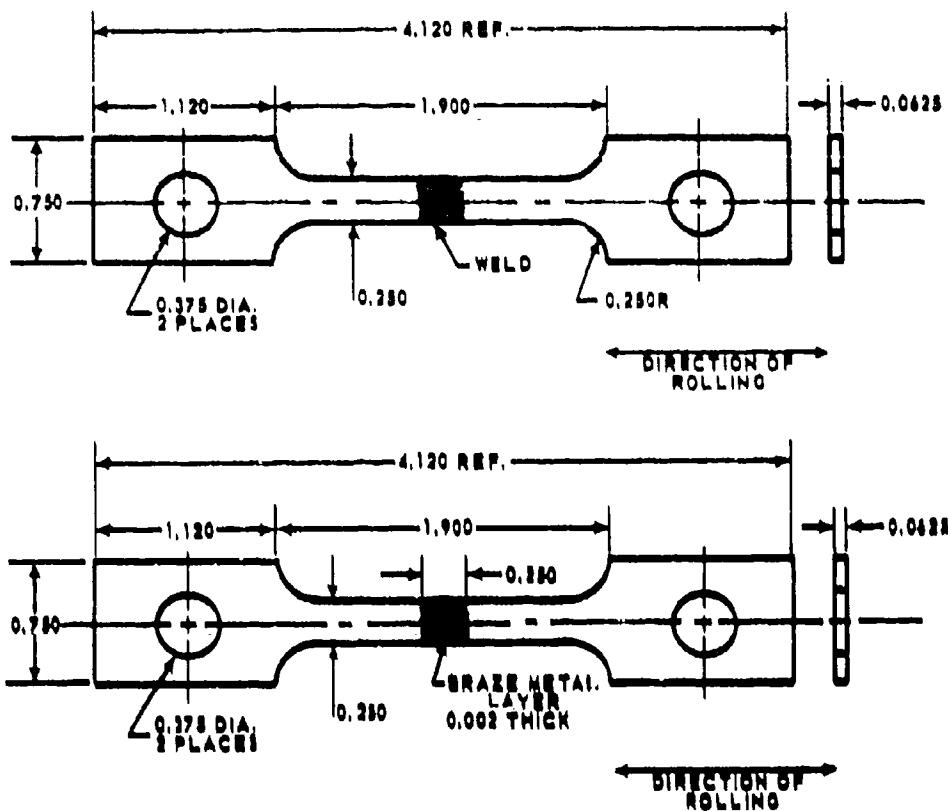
Designs of Welded (upper) and Brazed (lower) Test Specimens (67-258-1)
